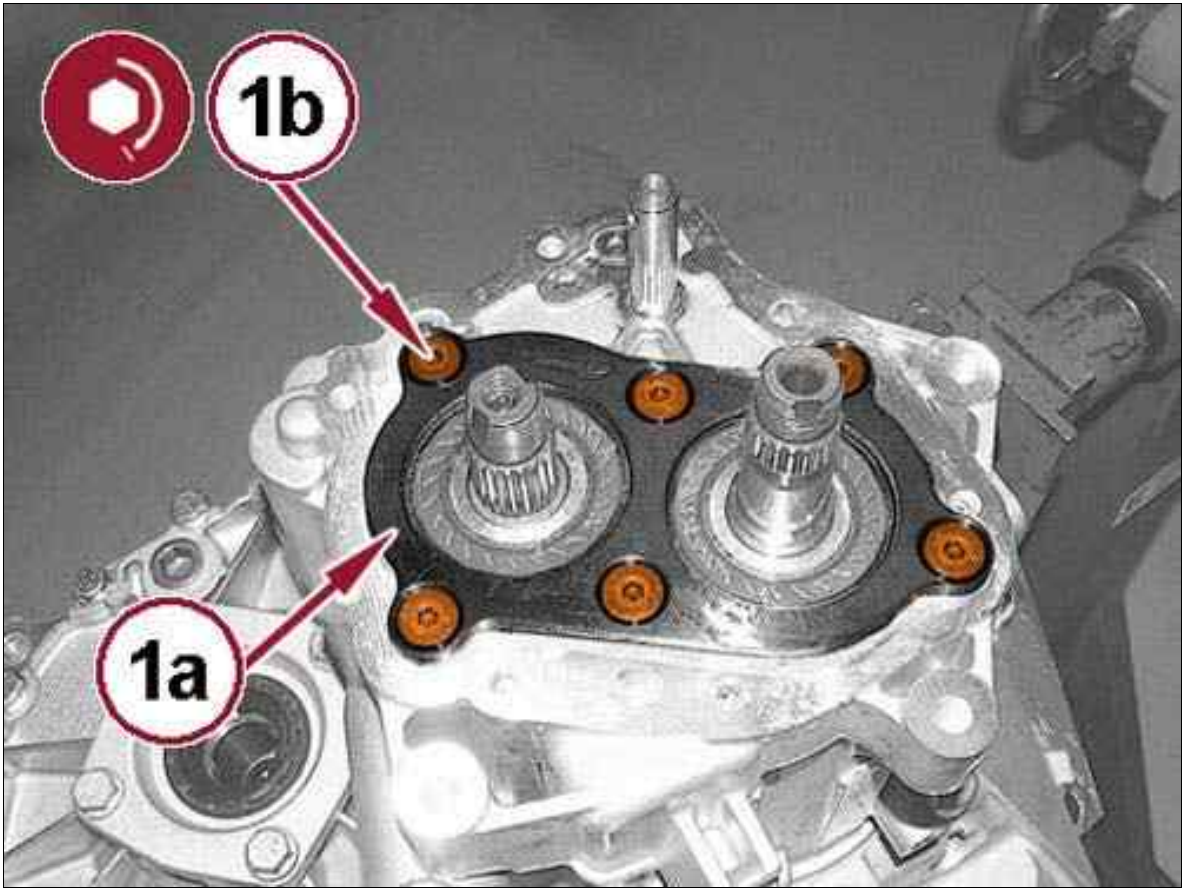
Input And Output Shaft Rear Bearing Snap Rings
